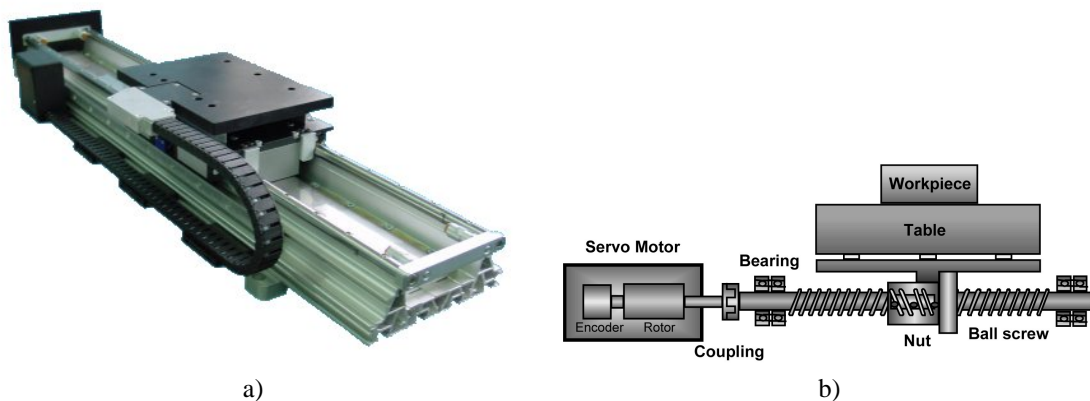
a) Example of a linear motor for industrial positioning purposes and b) example of the application of a spindle drive system in positioning a table.
